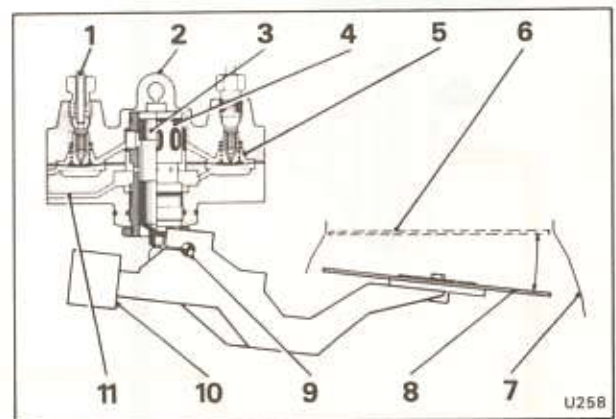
Air flow sensor and fuel distributor (mixture control unit)
